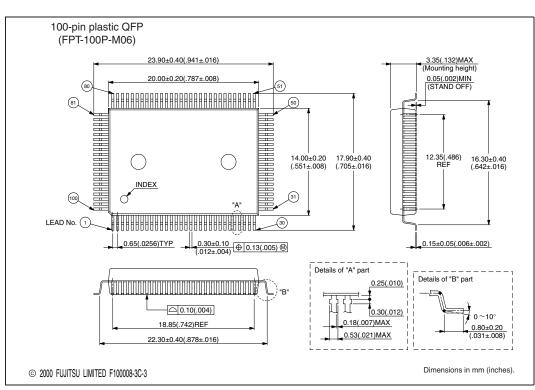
"Package Dimensions" shows the package dimensions of the MB90590 series.
